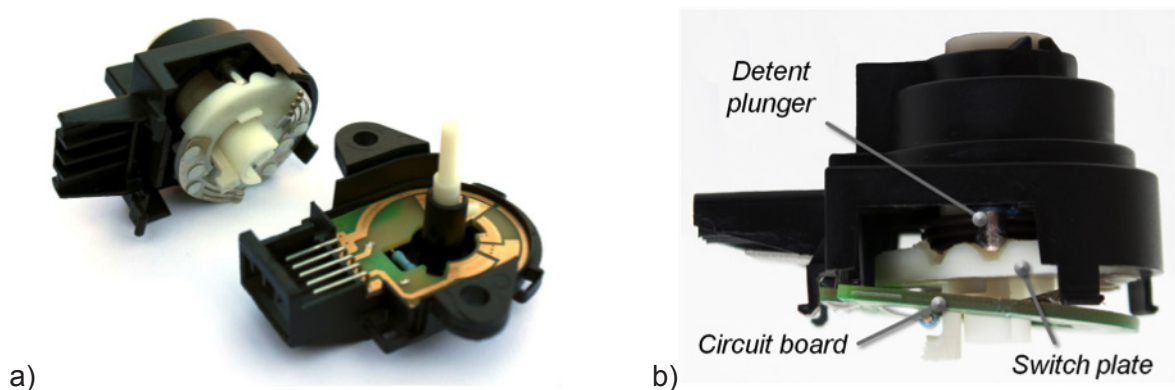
Product structure of a) rotating components and b) locking mechanism in the ignition switch
